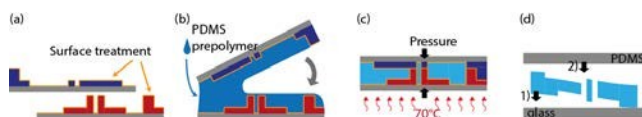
Manufacturing process. Process flow for the manufacturing of double-sided molding of PDMS in three steps: (a) mold surface preparation, (b-c) PDMS device layer preparation, and (d) transfer bonding of PDMS layer from molds to assembly.
